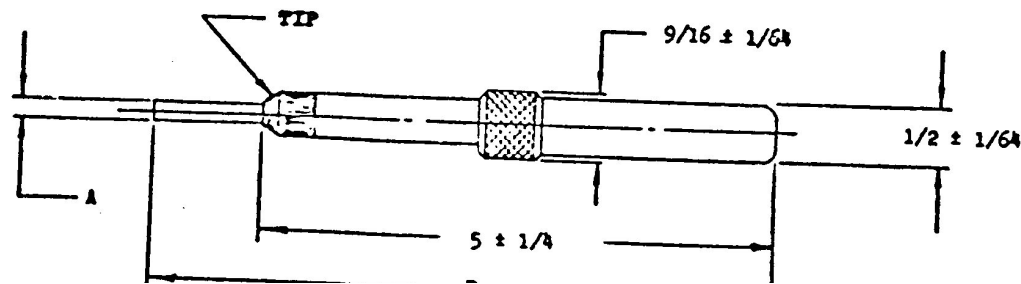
Type IV, Class 1, Style a, tang break-off tool for 1/4 (0.250) and smaller unified coarse and fine thread sizes
